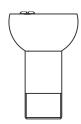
Pipe, Wedge, Pin & Trilobular™ Ball assembly.
